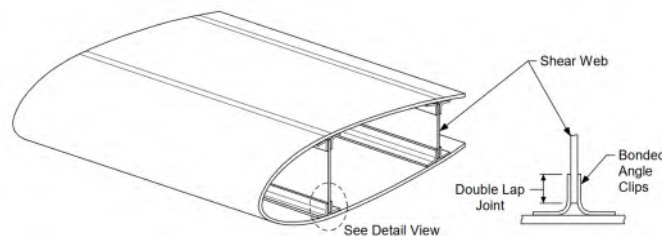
Generic bonded wing spar construction with double lap joint [37]
